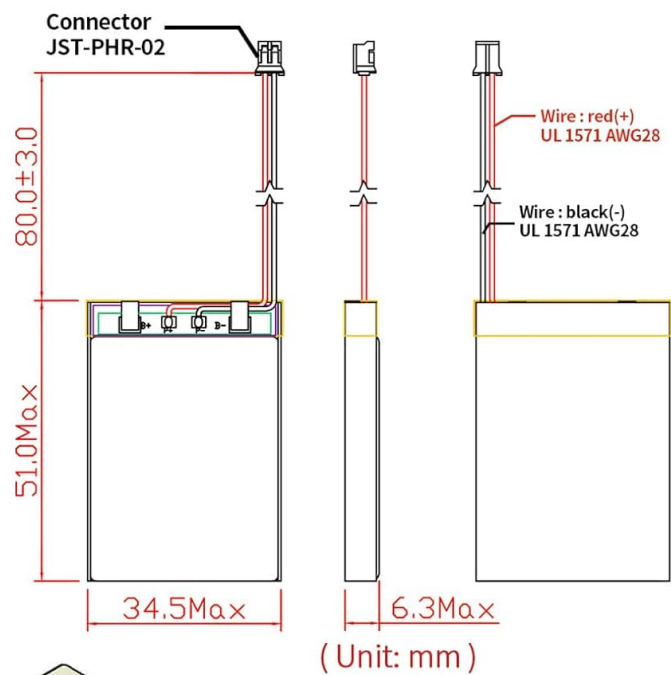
Technical specifications and dimensional drawing of the LP603449 battery.
